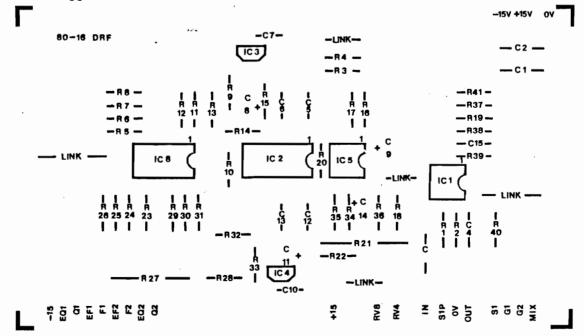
COMPONENT OVERLAY FOR 80-16 PCB
